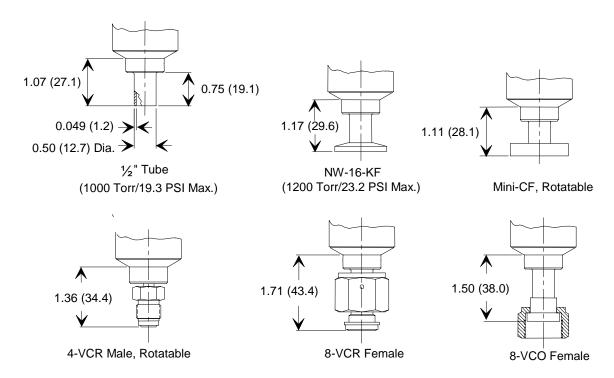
Fitting Dimensions of the High Pressure Type 722B Transducer
